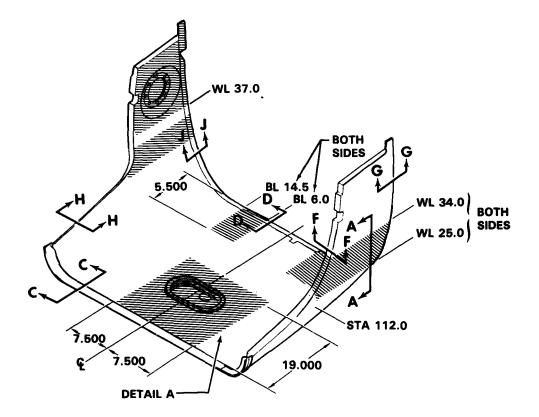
Honeycomb Panel – Aft Lower Cabin Shell Repair (Sheet 1 of 4)
